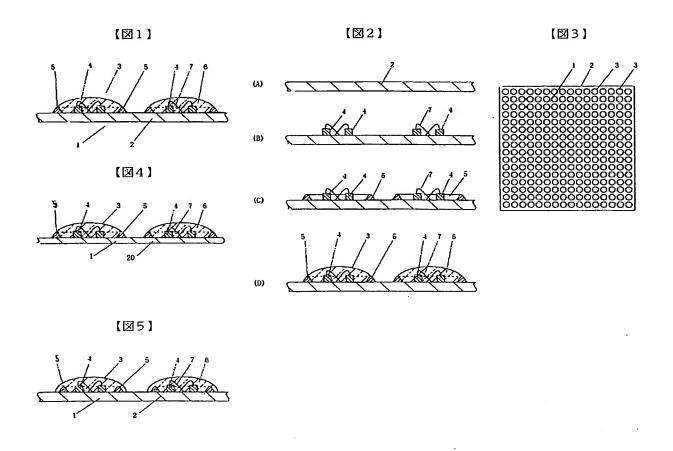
It is an important section sectional view showing other examples of this invention.
